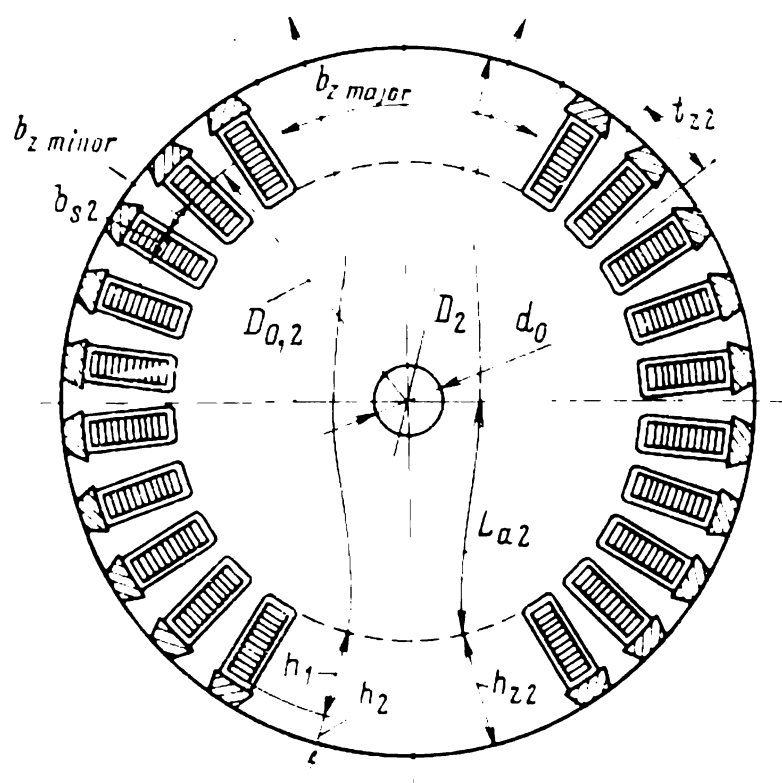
Dimensions of the active zone in the rotor of a nonsalient-pole machine
